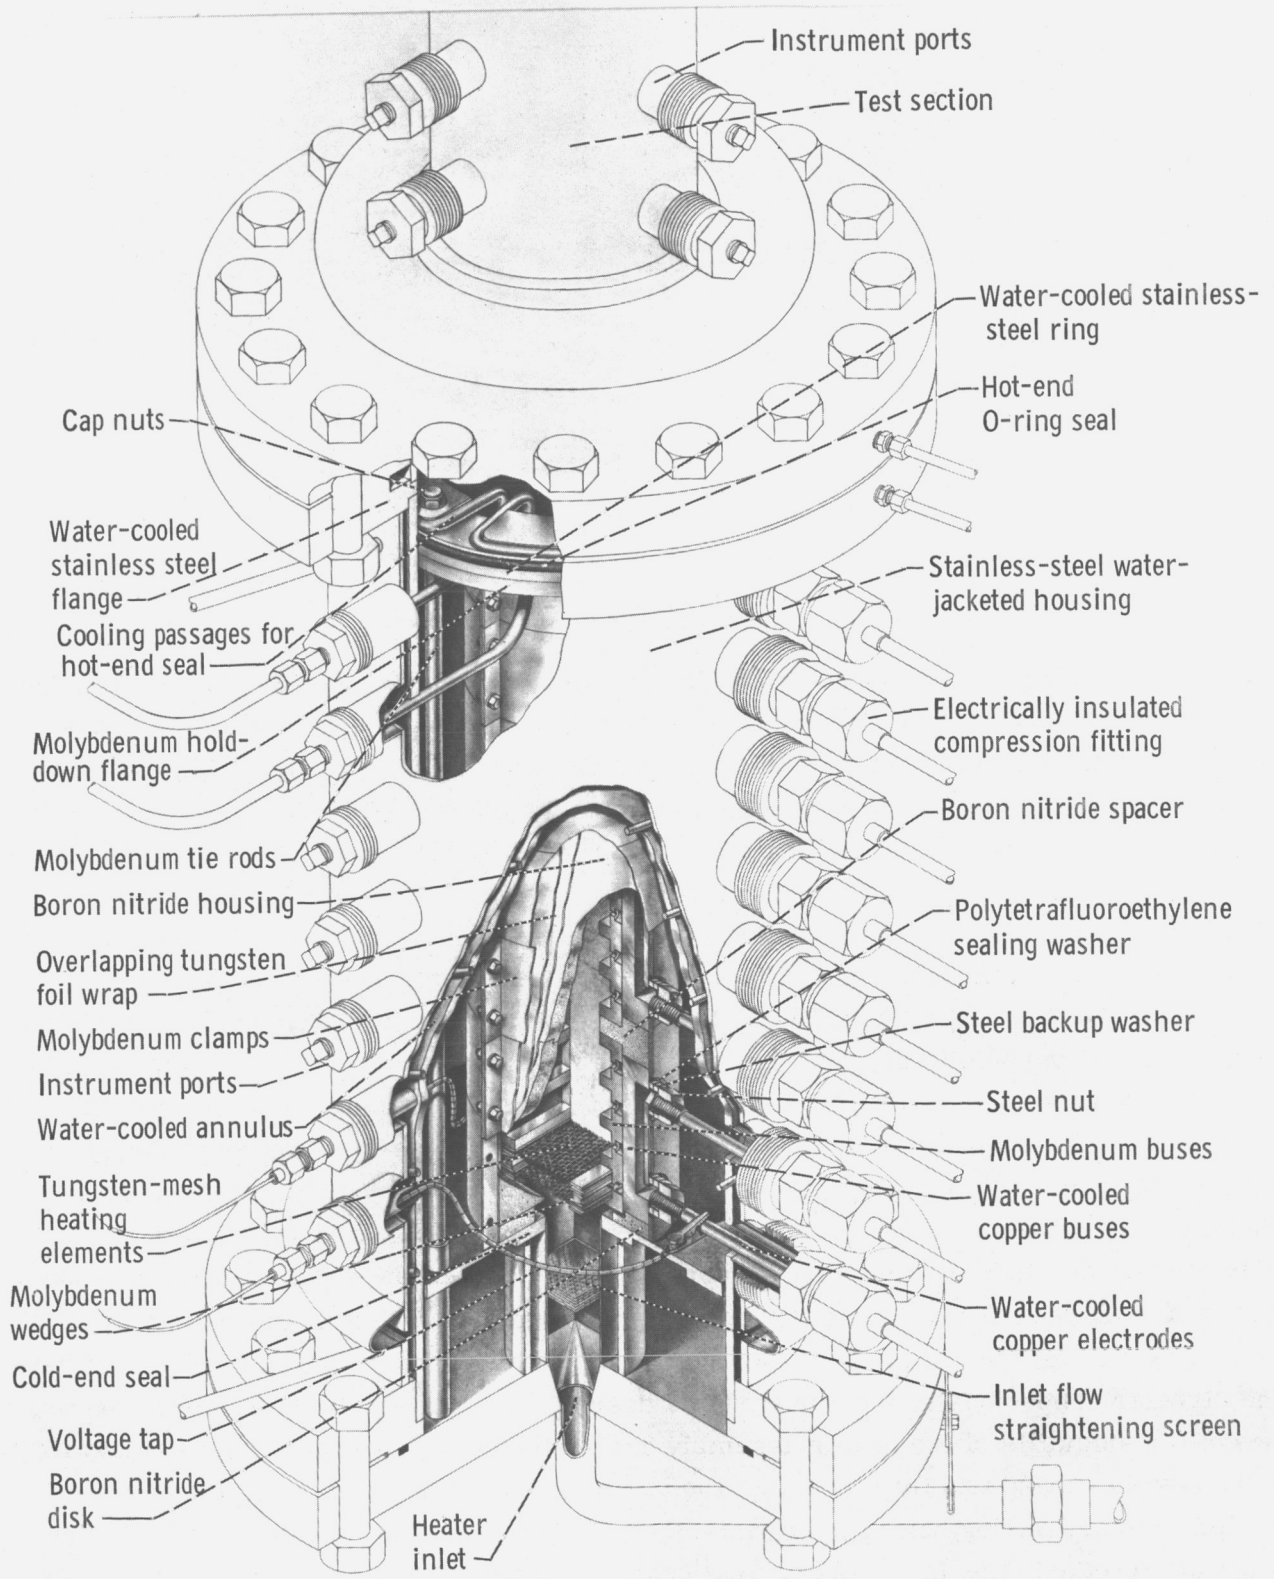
Heater assembly with cutaway views of hot end and mesh bank assembly.
